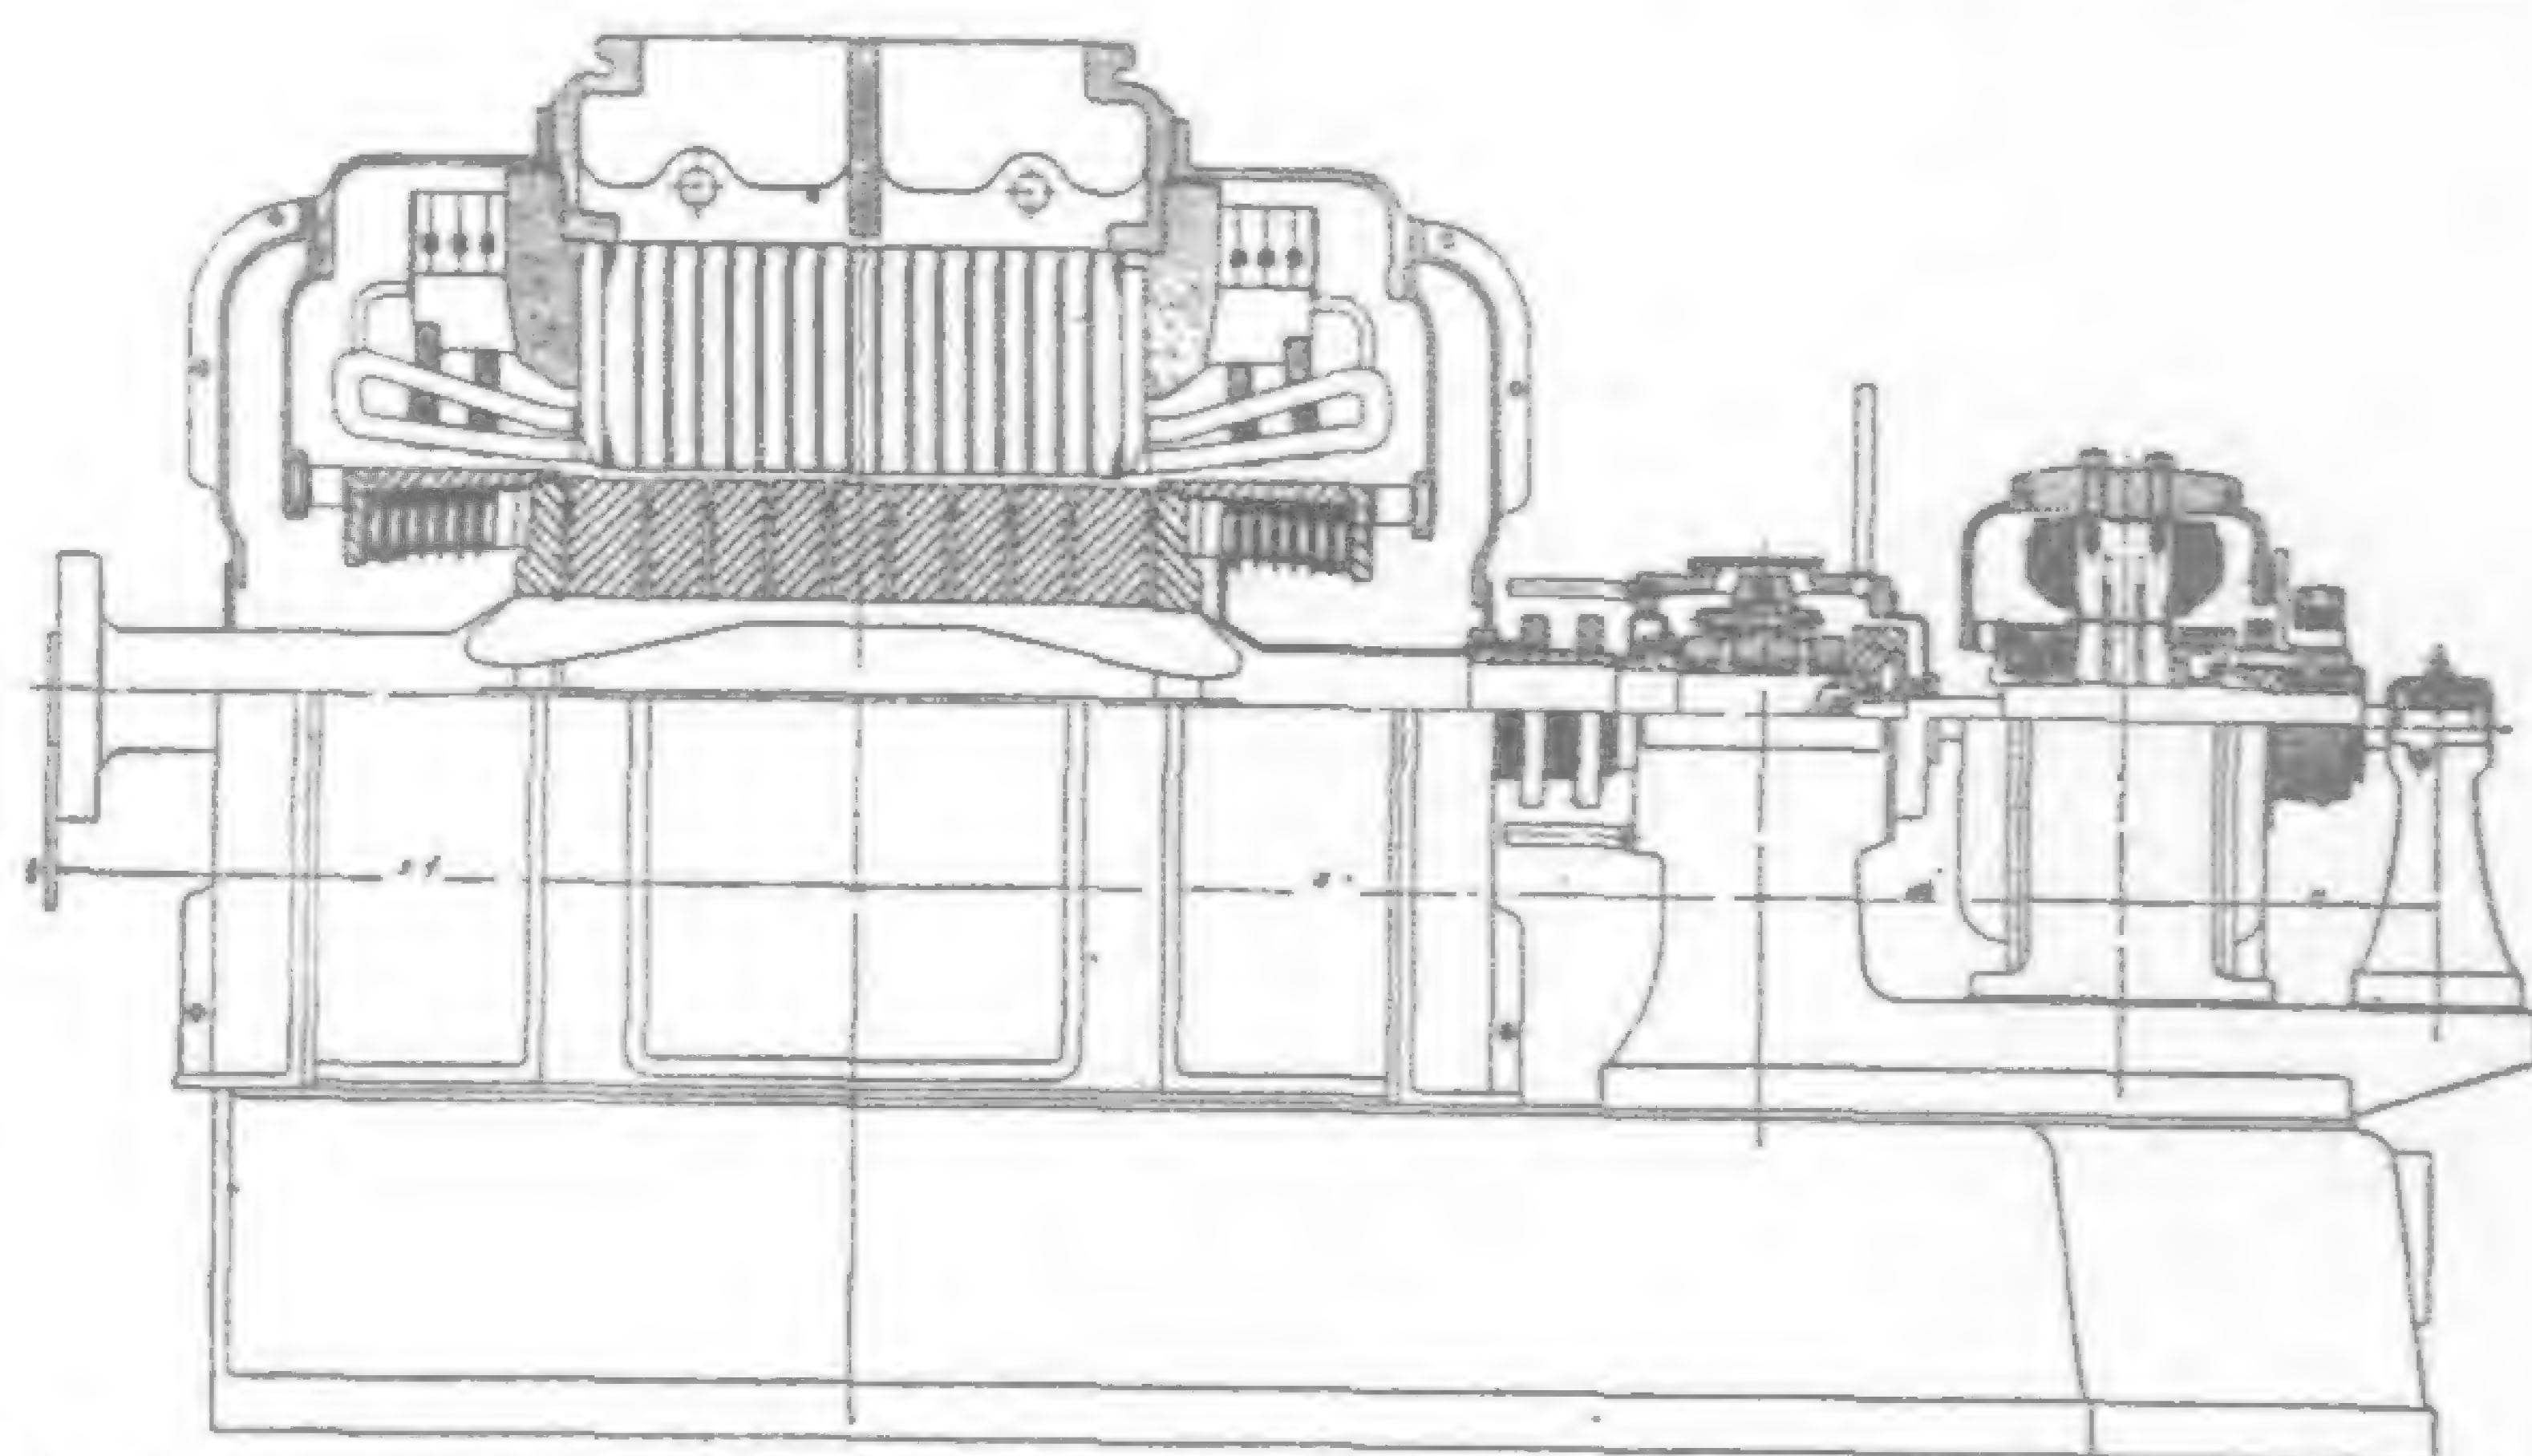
B.T.H. 1,500 KW. Turbo-Generator. Elevation and Section of Electrical End
